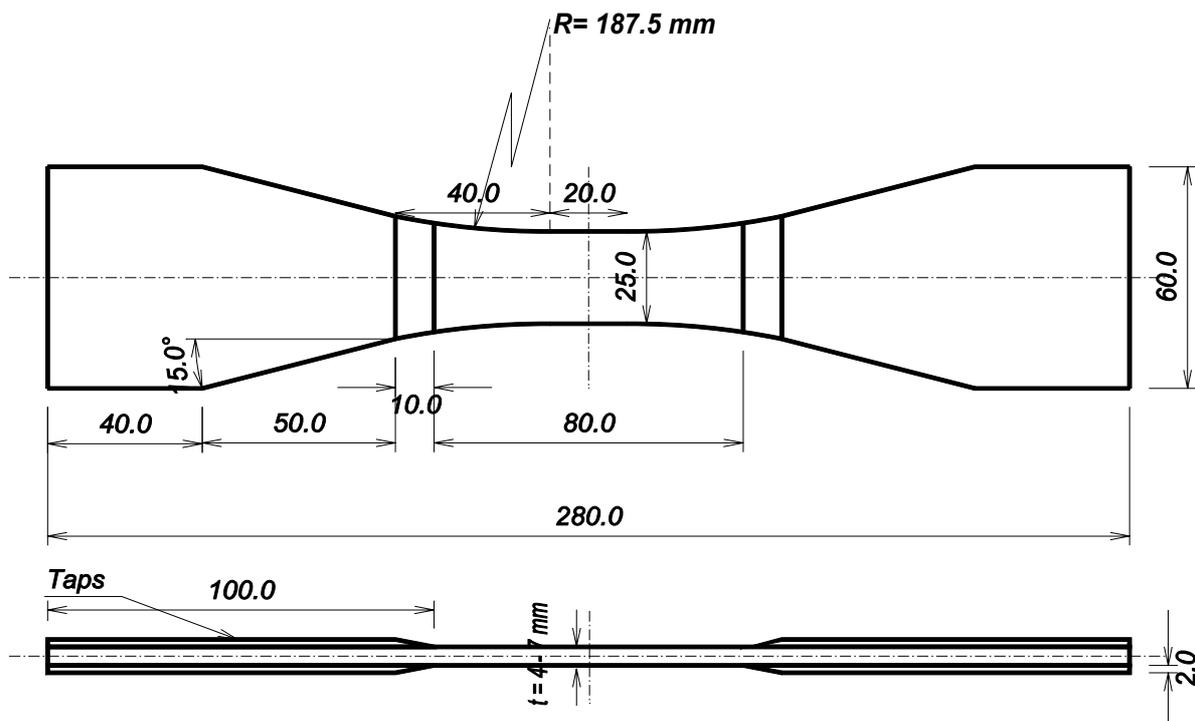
OPTIMAT BLADES proposed standard test specimen (RISØ short)
